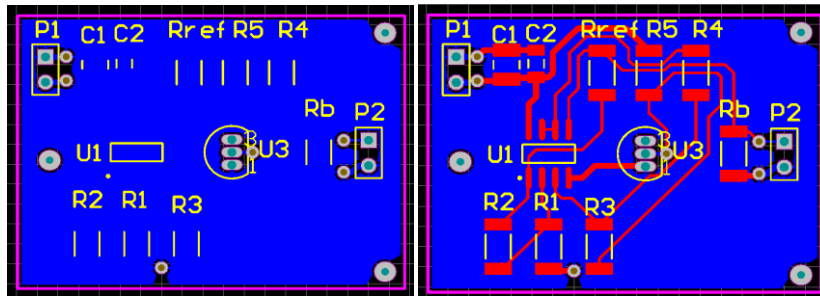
PRINTED MATTER WIT ADDED MASS GND ON THE BOTTOM SIDE.
